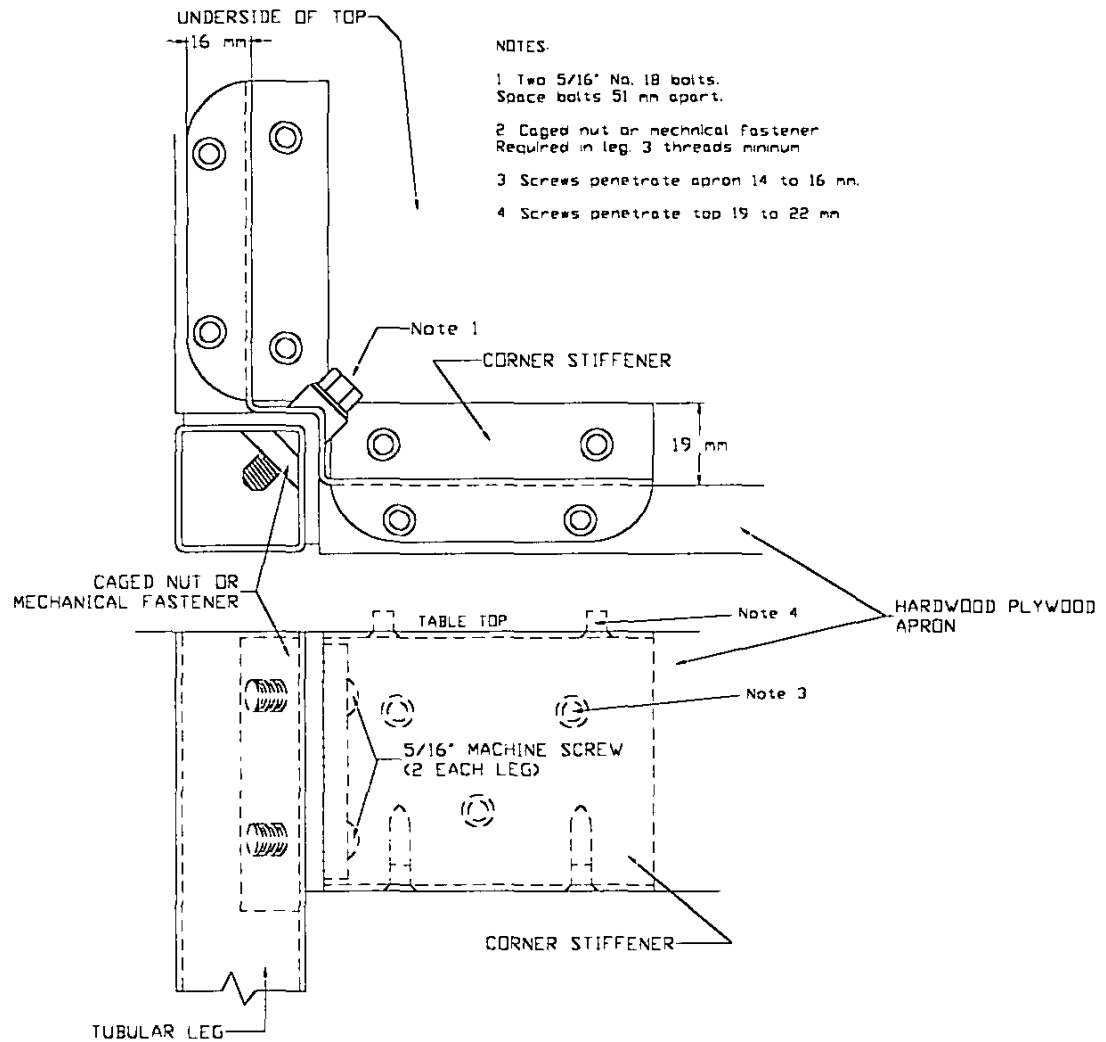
METAL CORNER BRACKET ASSEMBLY
